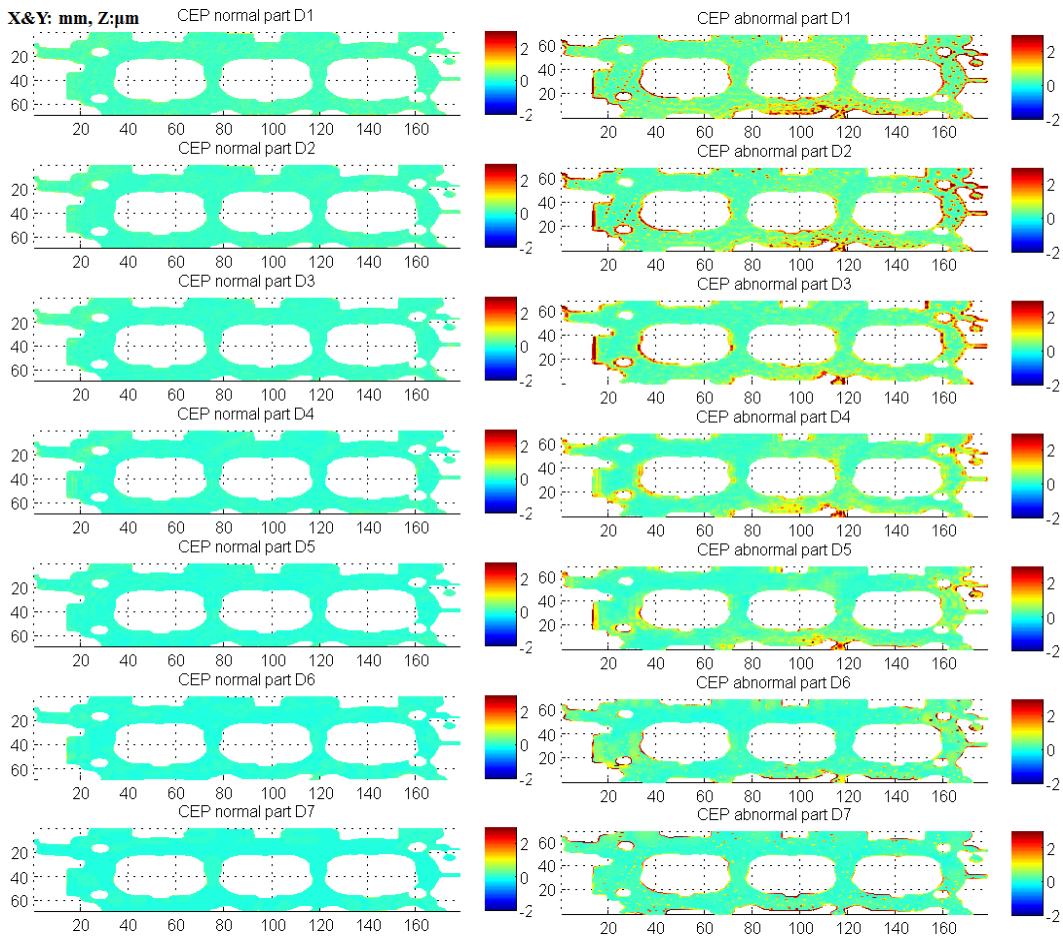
Comparison between normal and defective workpieces of reconstructed images from each level of aluminum workpieces
